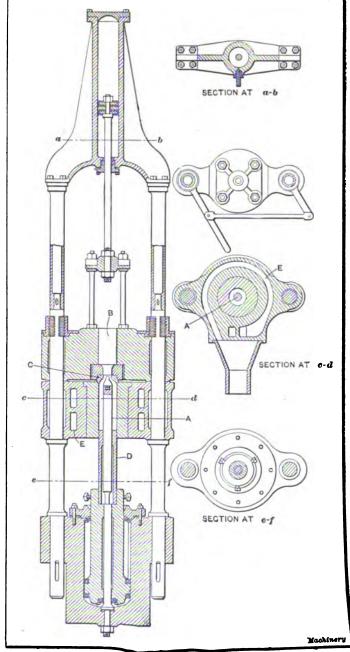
Hydraulic Press for Making Tin-lined Lead Pipe
